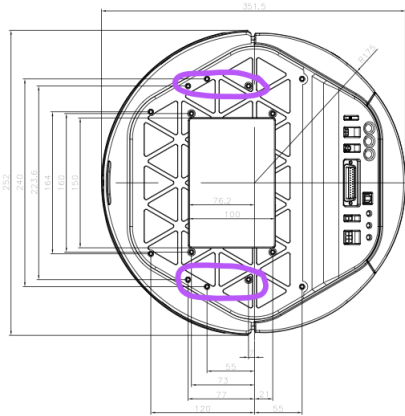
Kobuki drawing, with marked holes used for attaching L profiles, image from [55].
